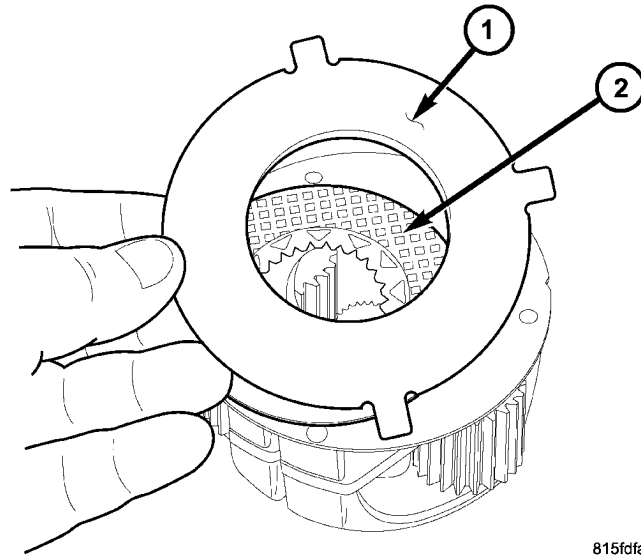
REMOVE FRICTION DISC APPLY PLATE
